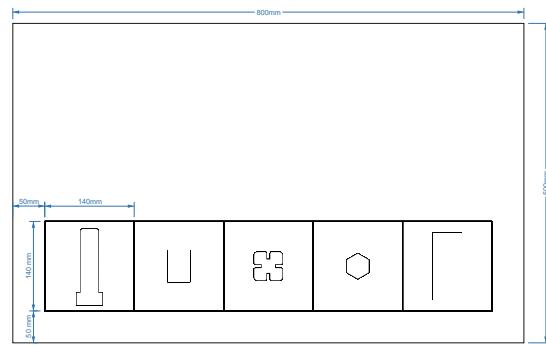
Exemplary Rotating table and generic technical drawing.
